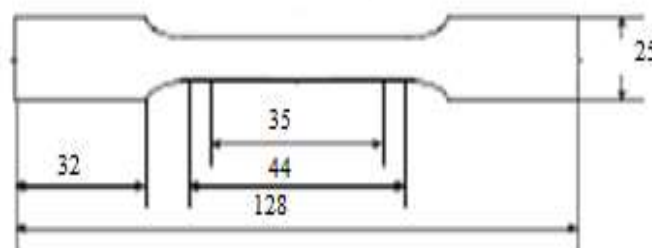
B Flat Tensile Test Specimens (dimensions are in mm)
